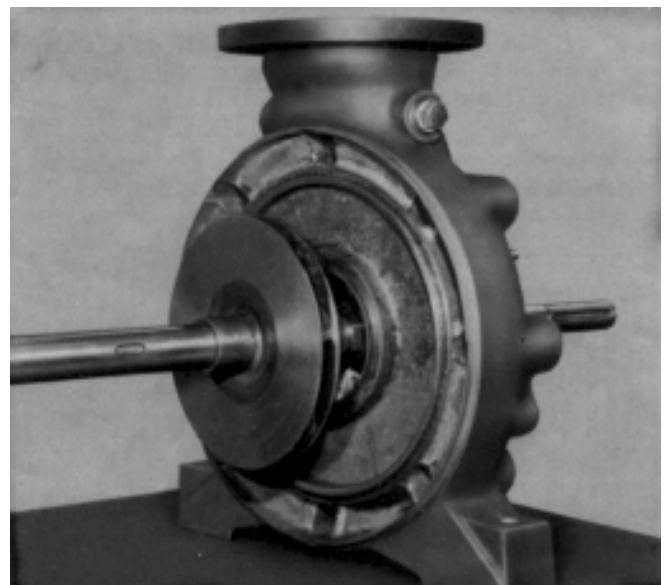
Shaft with first stage impeller inserted into suction casing.
